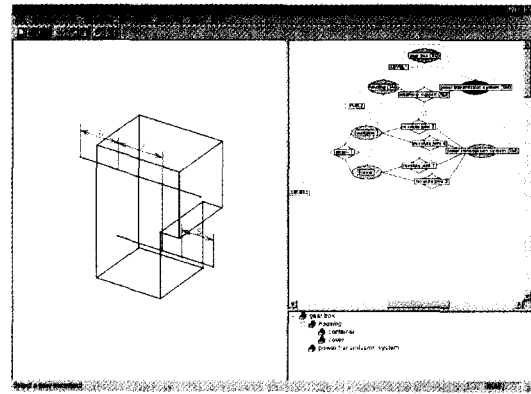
Dimensioning of power transmission system with respect to fixed housing & revolute joints geometry.
